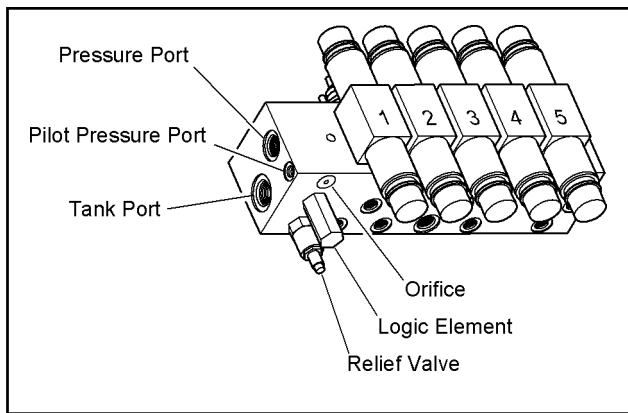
HYDRAULIC MANIFOLD - VIEW 1
